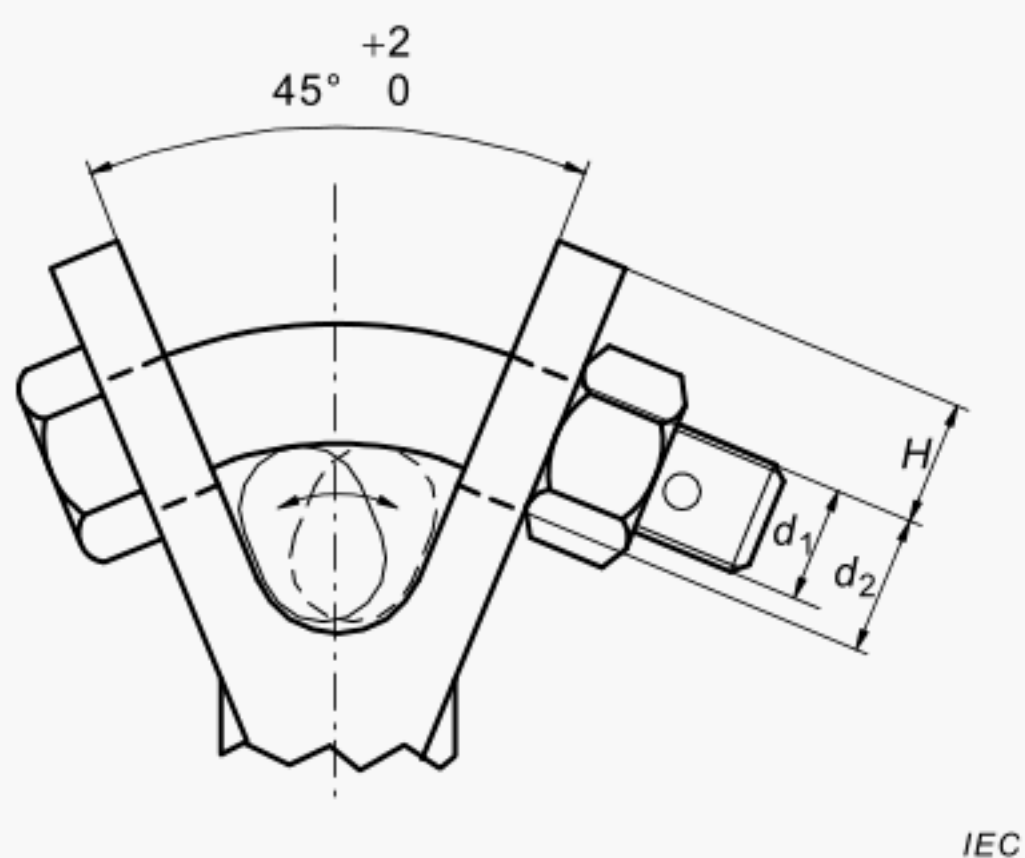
Dimensions of Y-clevis couplings and gauges
